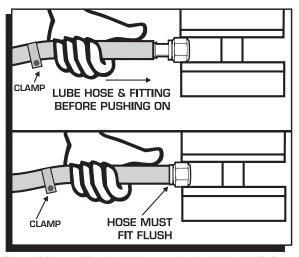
Installing Fuel Hose to the Push-Lock Fittings.
